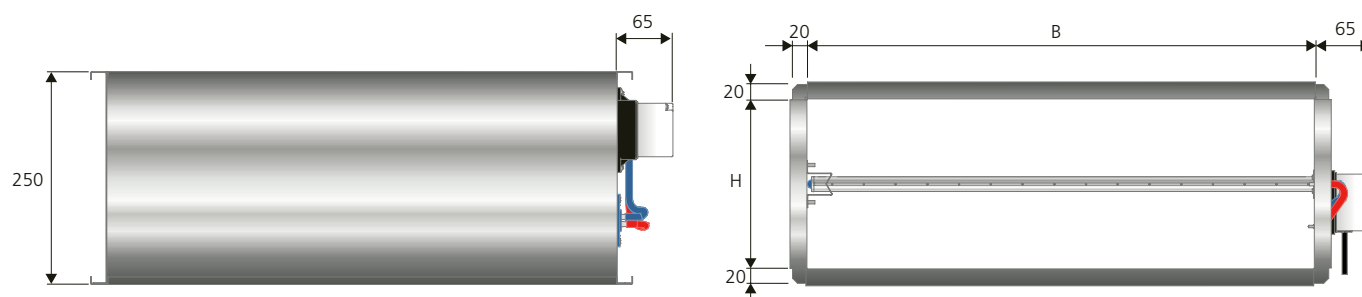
Dimensions (mm), REACT M GMB rectangular.
